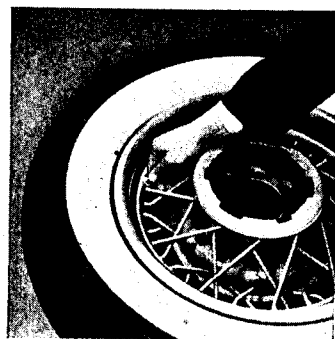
Remove the rim nut and push the valve stem back into the casing as far as possible without letting go of the stem to make certain that the tube is not pinched under the bead; then reapply the rim nut. With the wheel flat on the floor, inflate the tire slowly, making sure that both sides of the tire are centered on the rim.
